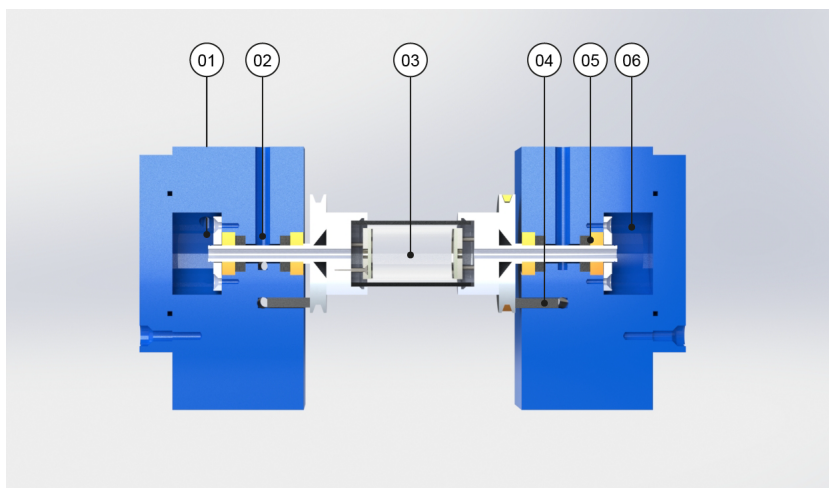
Spinning arc plasma reactor: (01) gas inlet in manifold block, (02) lubrication channel, (03) reactor-electrode assembly, (04) carbon block, (05) oil seal (black) and bearing (yellow), (06) vacuum chamber.
